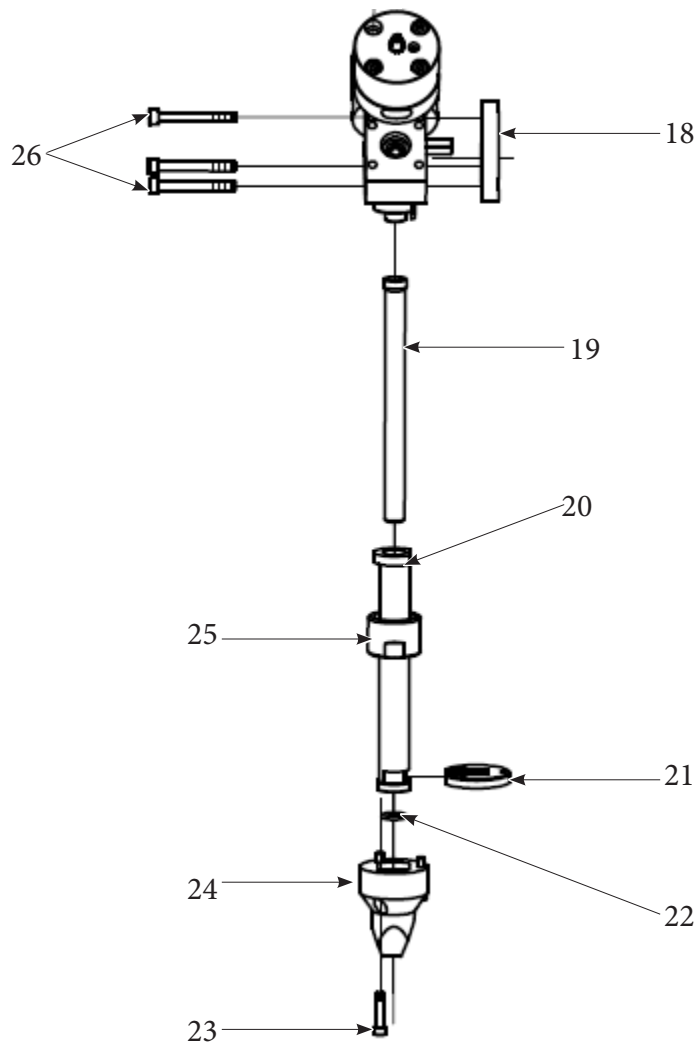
179 Series Valve Assembly Block Spacer and Optional Components
